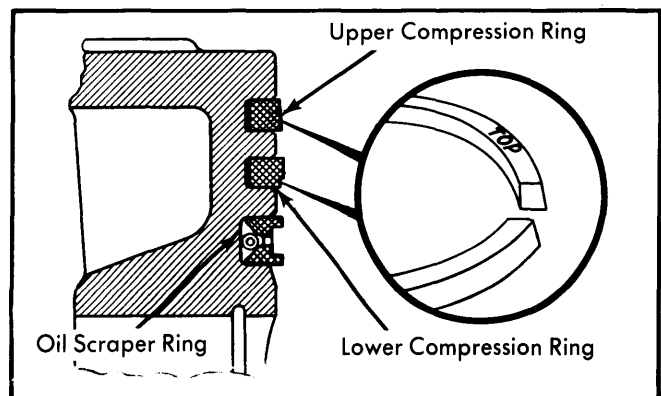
Piston Ring Installation — Word TOP Must Face Piston Crown
